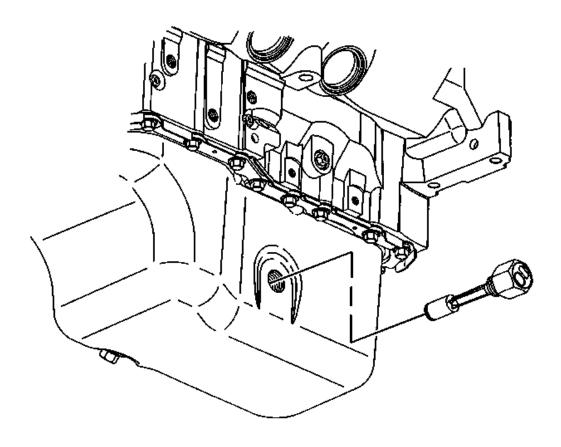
Oil Level Sensor Courtesy of GENERAL MOTORS CORP.
